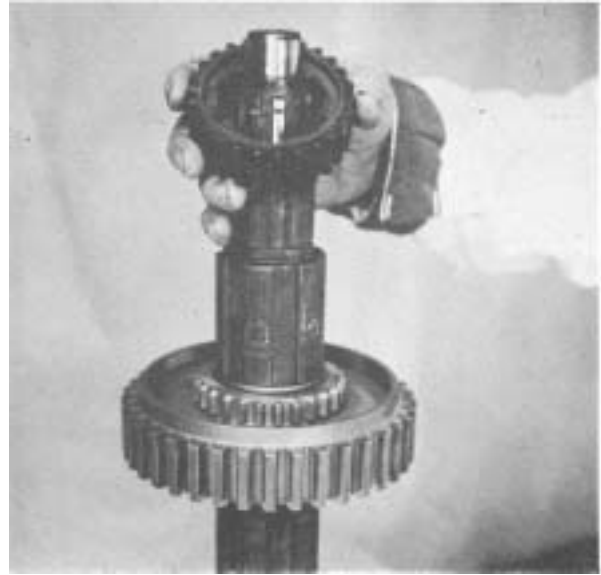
Remove 2nd & 3rd shift hub sleeve.
